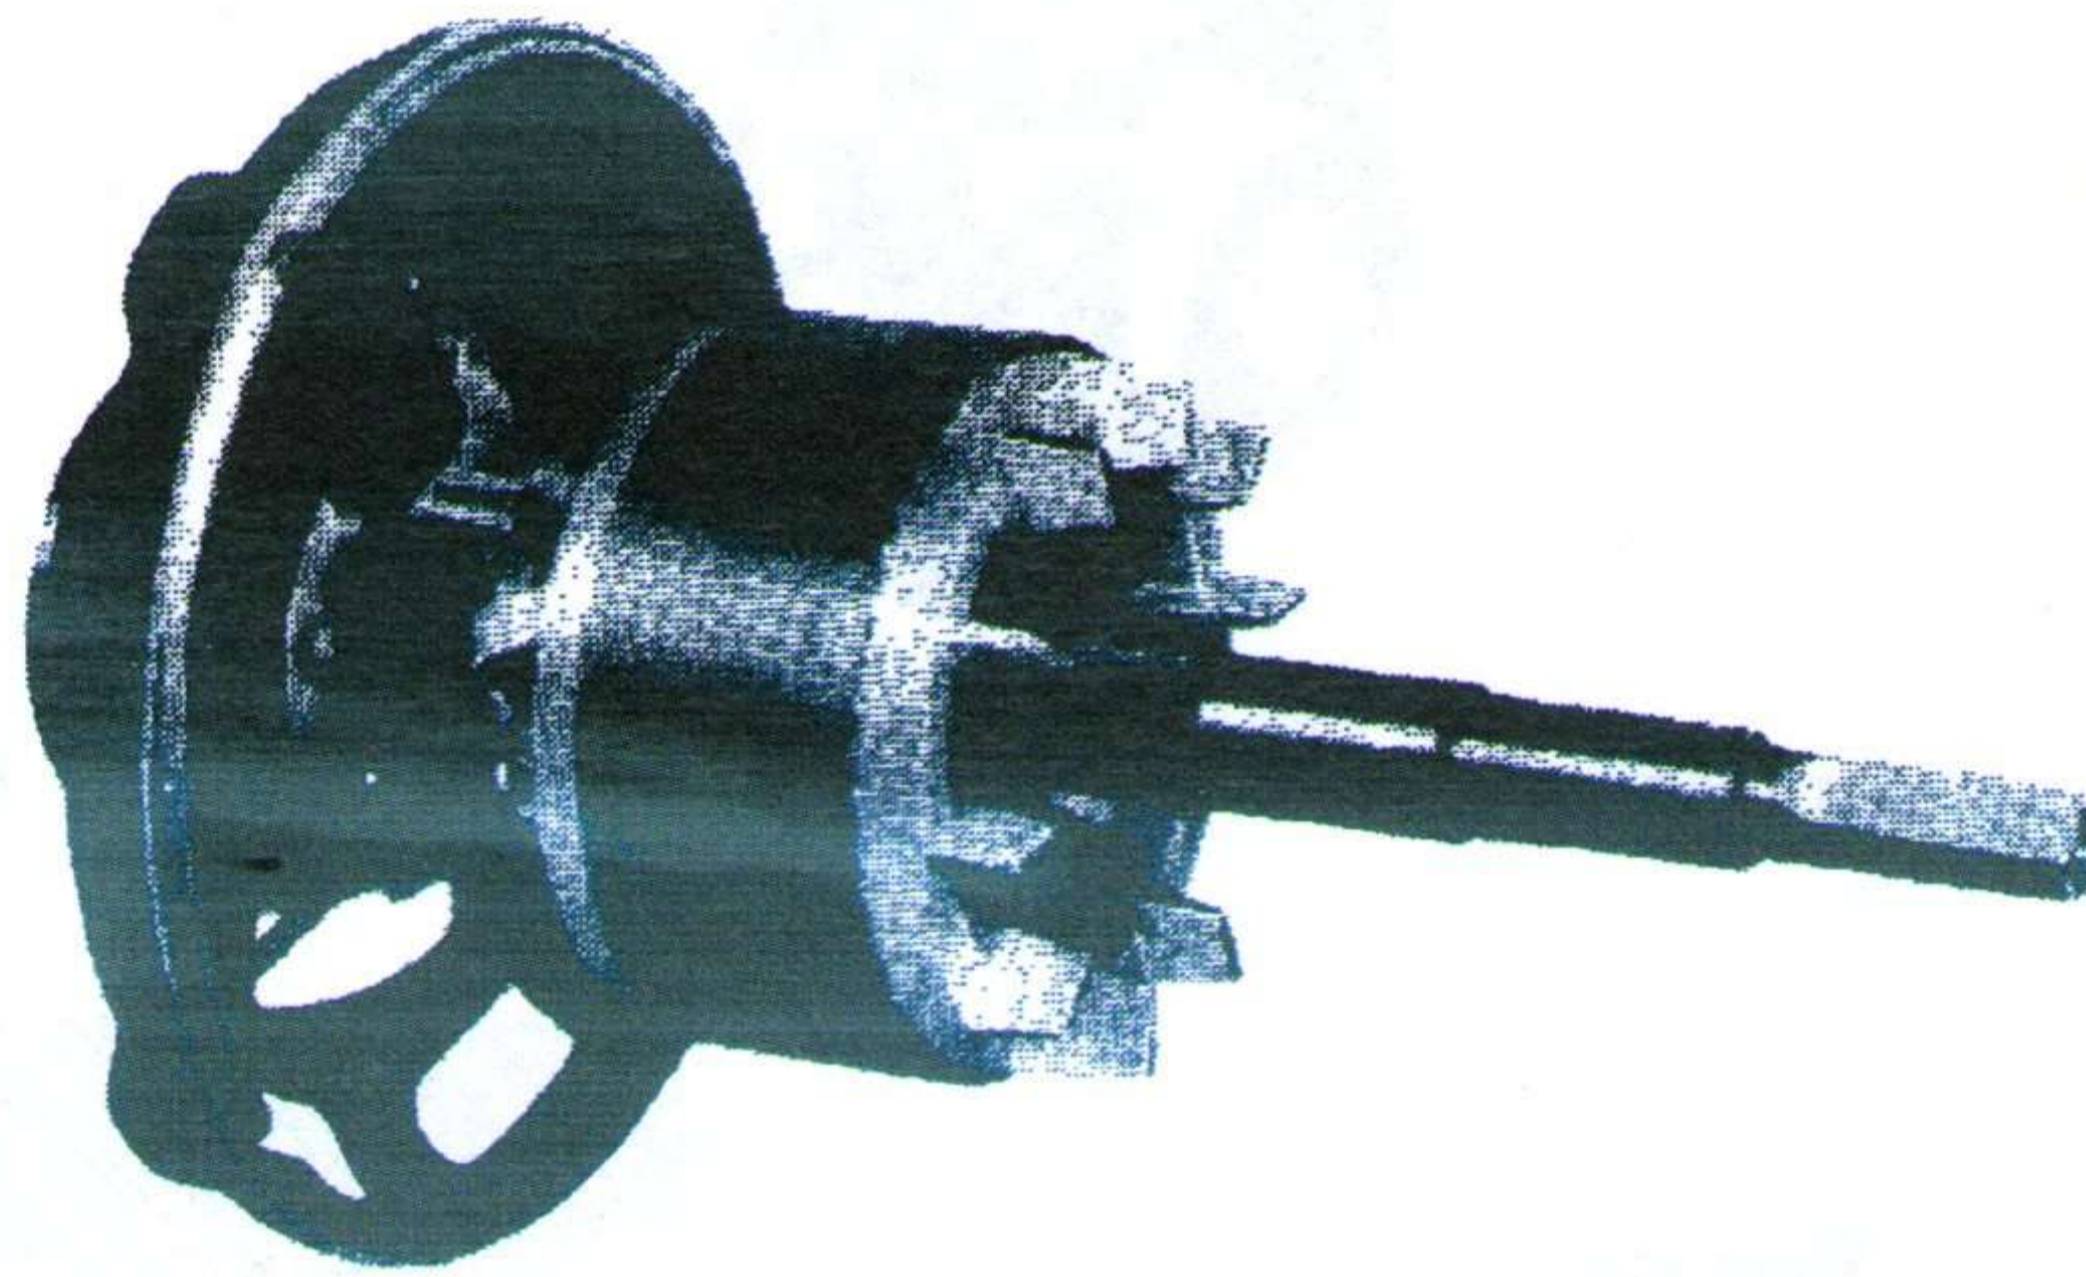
A complete rotor of a split-phase motor. (*Wagner Electric Co.*)
